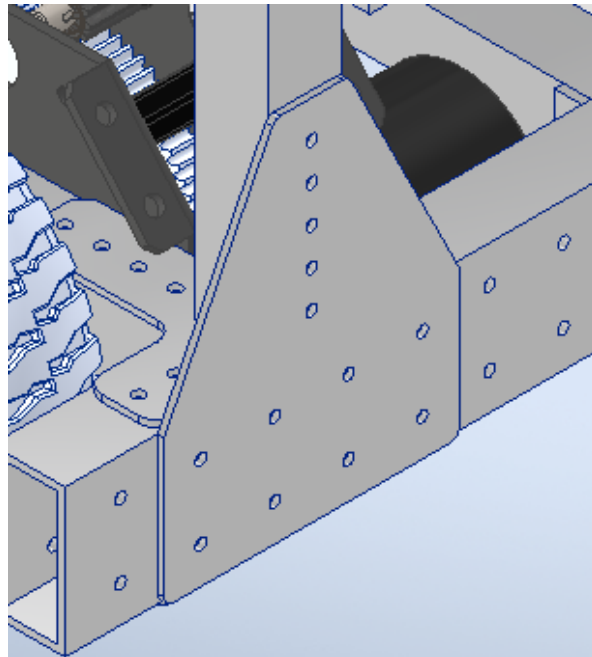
A custom gusset on the 2020 robot, connecting two frame pieces together. Note how the rivet holes are centered on the vertical tube, and a simple hole pattern is used on the horizontal tube.
